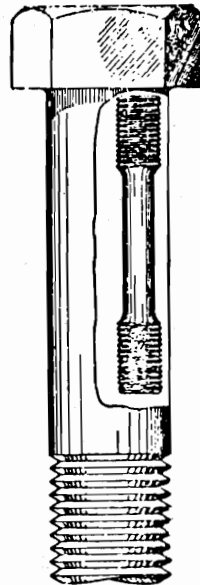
Location of Standard Round 2-in. Gage Length Tension Test Specimen When Turned from Large Size Bolt.
